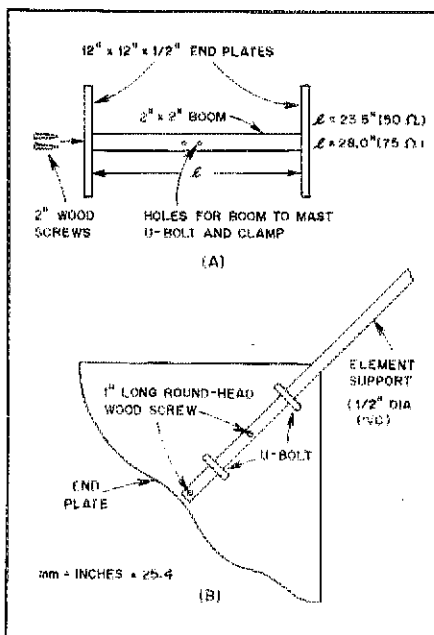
Boom and end-plate construction is shown in the drawing at A; element support attachment to end plate at B.
